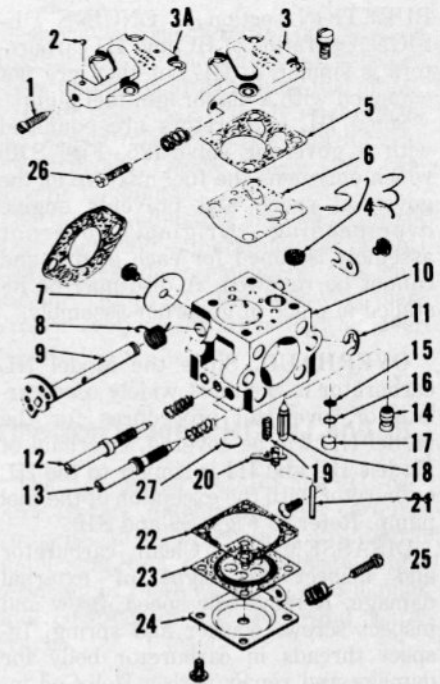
Exploded view of Tillotson Model HU carburetor. Note difference in idle speed screw location used on fuel pump covers (3 & 3A) of some carburetors. Idle speed screw (25) may be located in cover (24).
